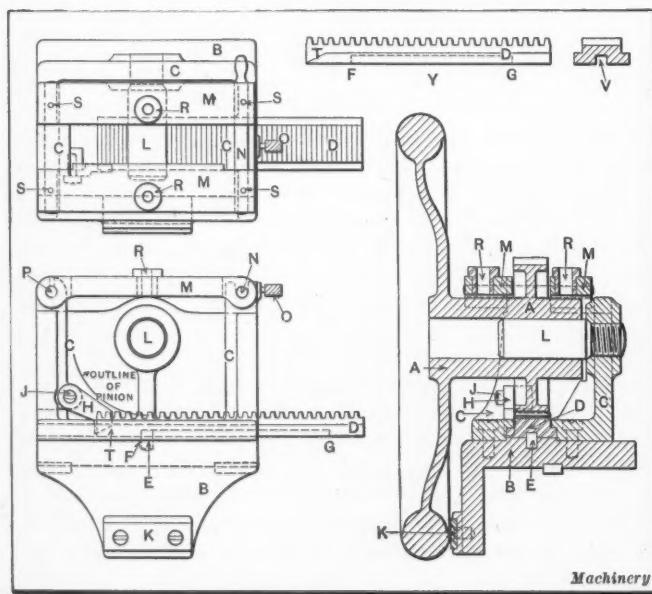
Jig for drilling Set-screw Holes in Work shown in Fig. 1
